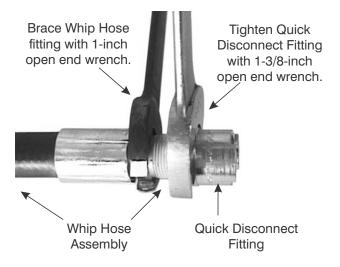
Secure the Q.D. Fitting to the Whip Hose fitting.
